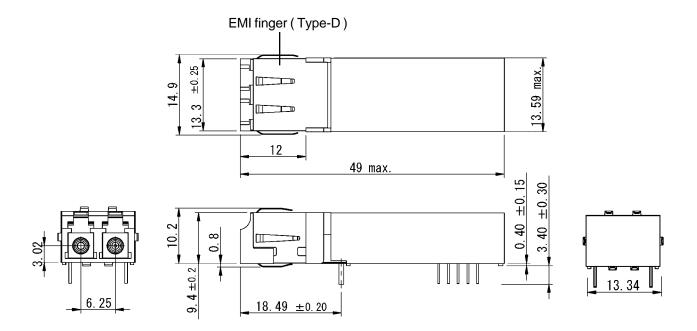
Outline Dimensions (SCM6211-JL-Z#)
